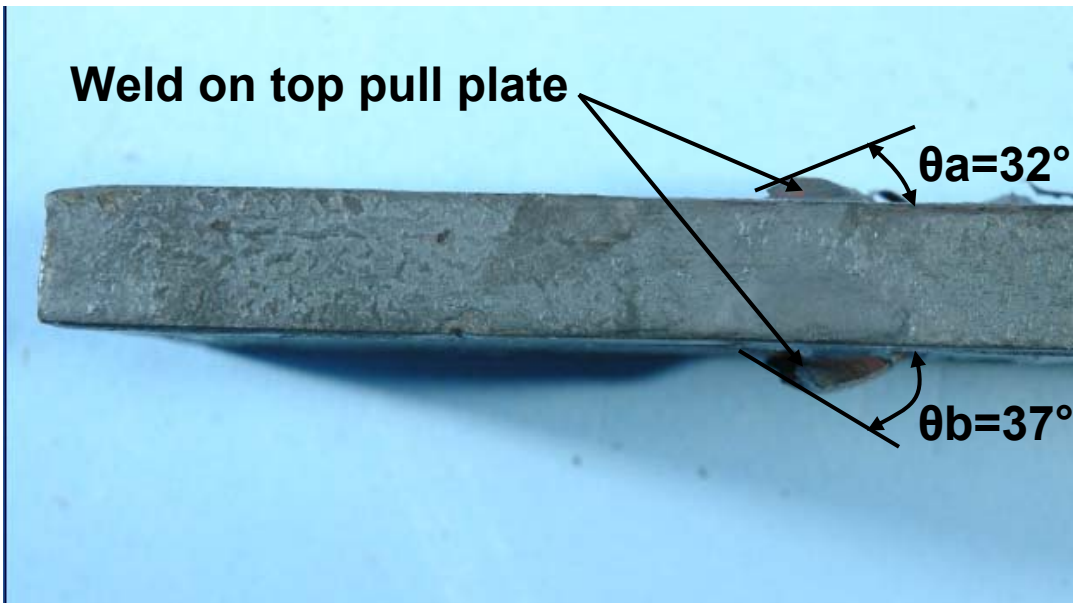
Photograph of a side view Specimen P5, where the profile of the fractured weld on the top pull plate is visible
